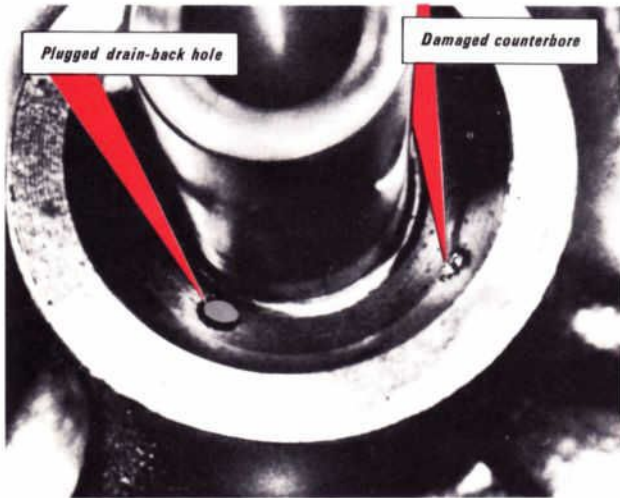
Plugged Drain-Back Hole and Damaged Counterbore
